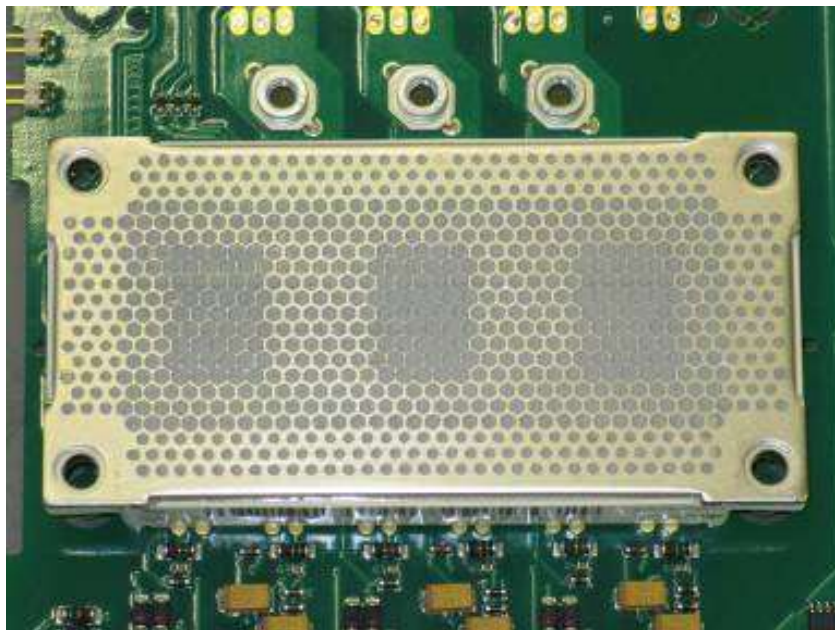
Module with TIM-Layer after crossing the wave soldering oven
